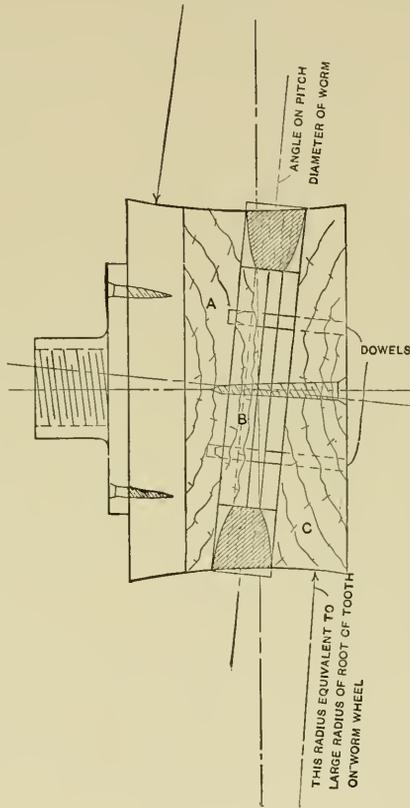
Face Plate and Angle Rig for Turning Teeth
